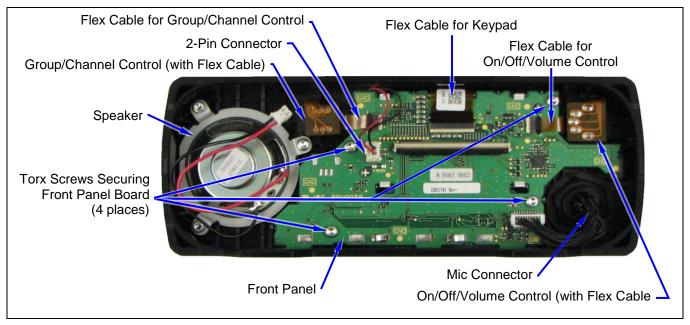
Removing the Front Panel Board and Display from the Front Panel
